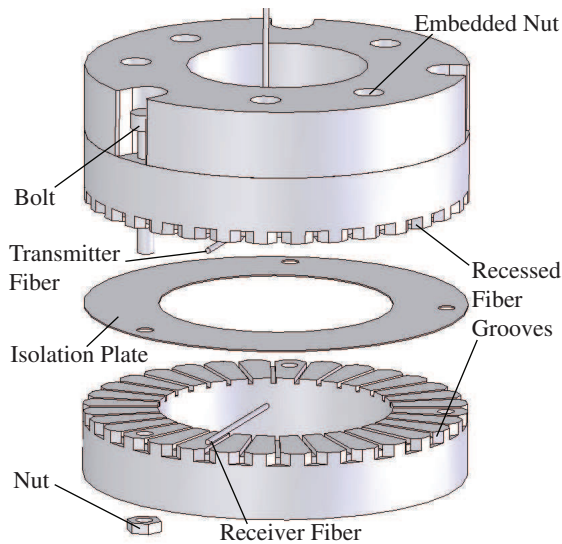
Exploded view of Version 2 of OFPS. Components are shown for only 1 of the 32 sensing elements. Bolts are used for securing unit, and embedded nuts are used for attaching to robot finger.
